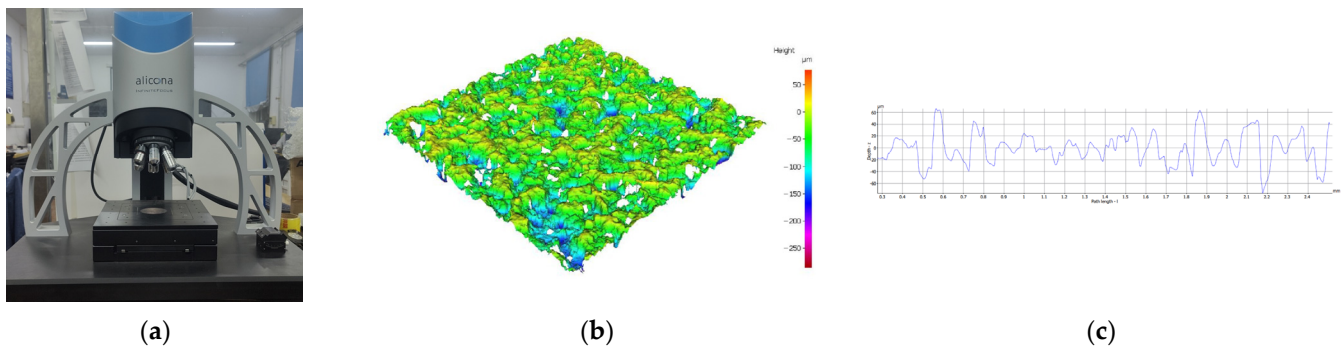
Test equipment and test results. (a) Alicona infinite focus G5 surface morphometer; (b) Inspection of surface morphology; and (c) grinding wheel 2D topography.
